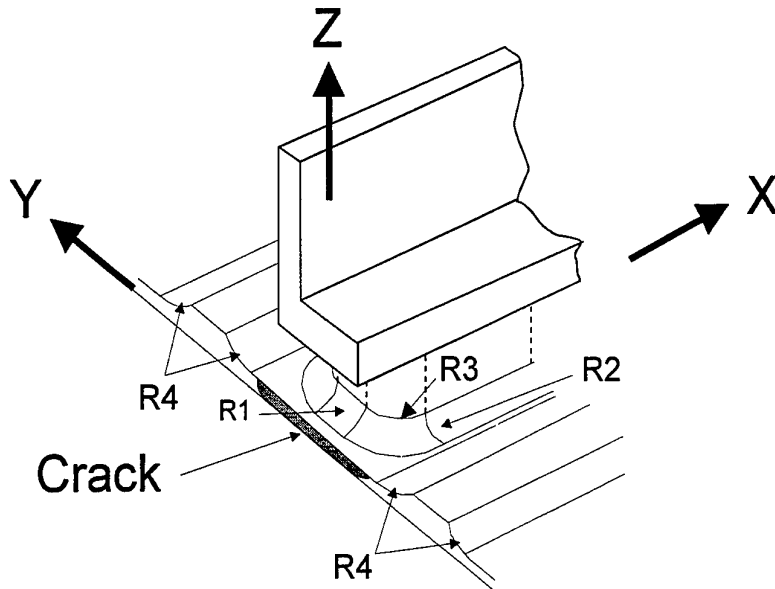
Detail section view of crack and fuel flow hole area.
